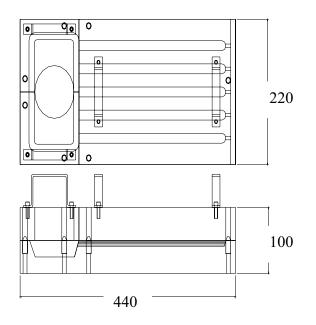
Top and front views (dimensions in mm) of the mould (Courtesy N-Tec Limited <sup>23</sup>).
